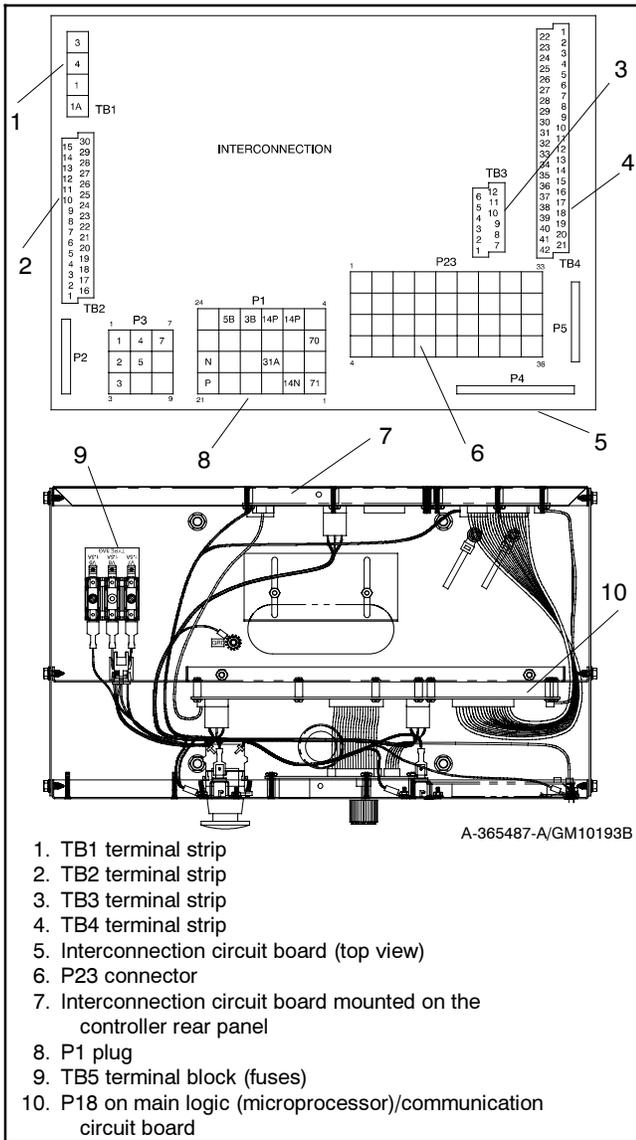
Disconnecting Controller Circuit Board External Wiring Connections
